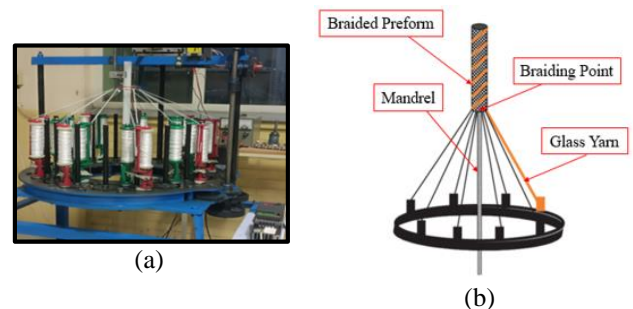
Braiding Machine: (a) Real view and (b) Schematic view
